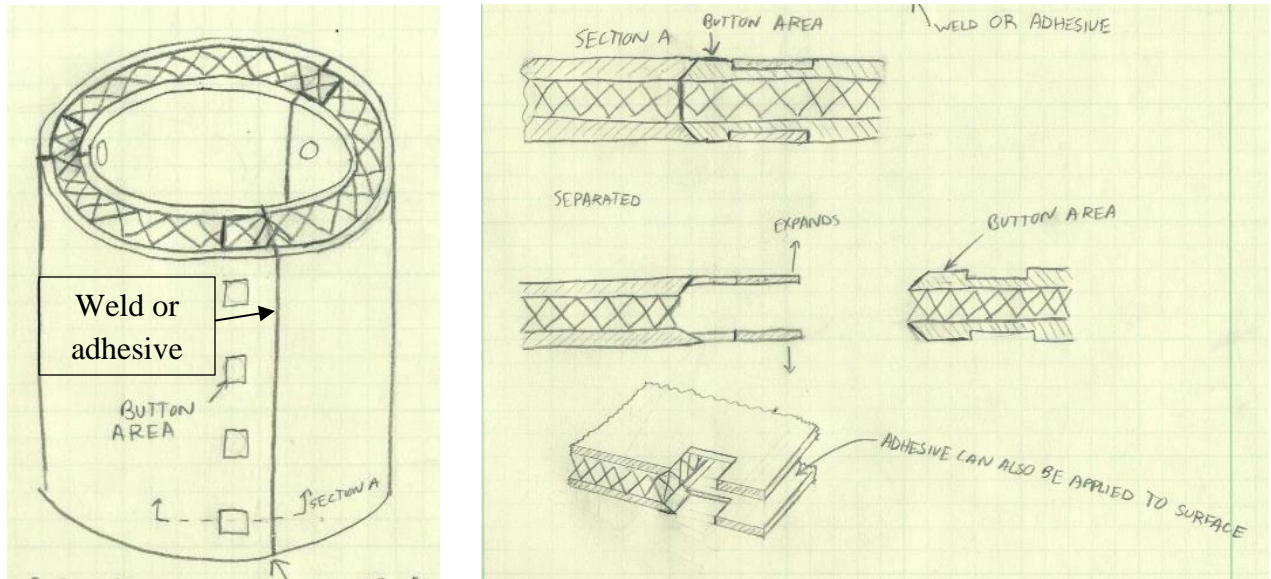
Button joint weld (6a) and button joint adhesive (6b)
